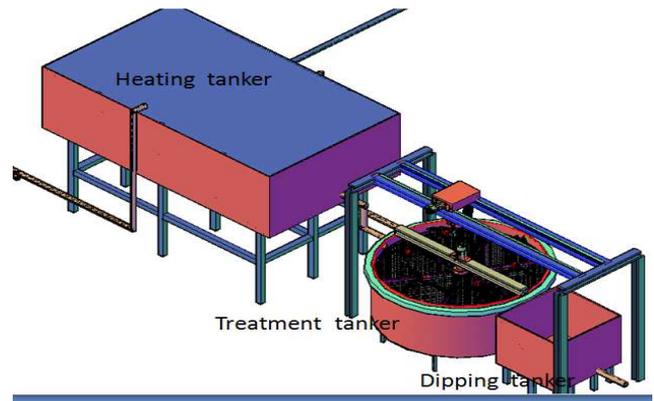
Assembly drawing of the new seed cane hot water treatment plant.
